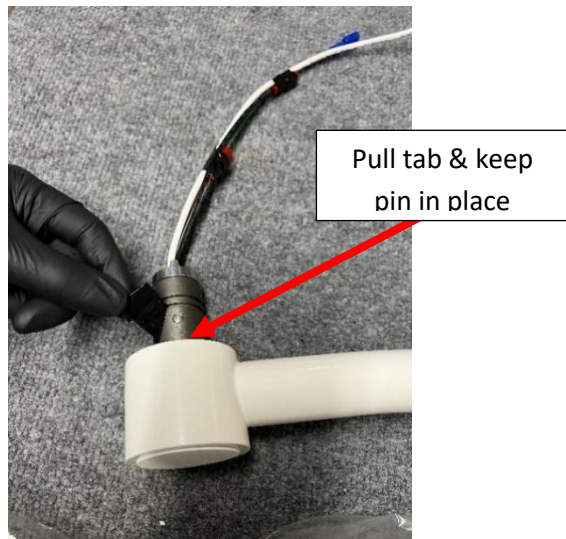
Prepare the Light Head to Mount to the LCH Spring Arm with Camera
